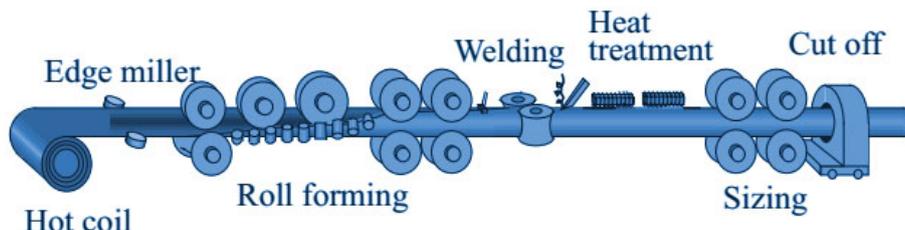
Electric resistance welding process of a steel pipe. [33]
